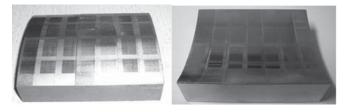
Workpieces used for testing surface roughness after burnishing.
